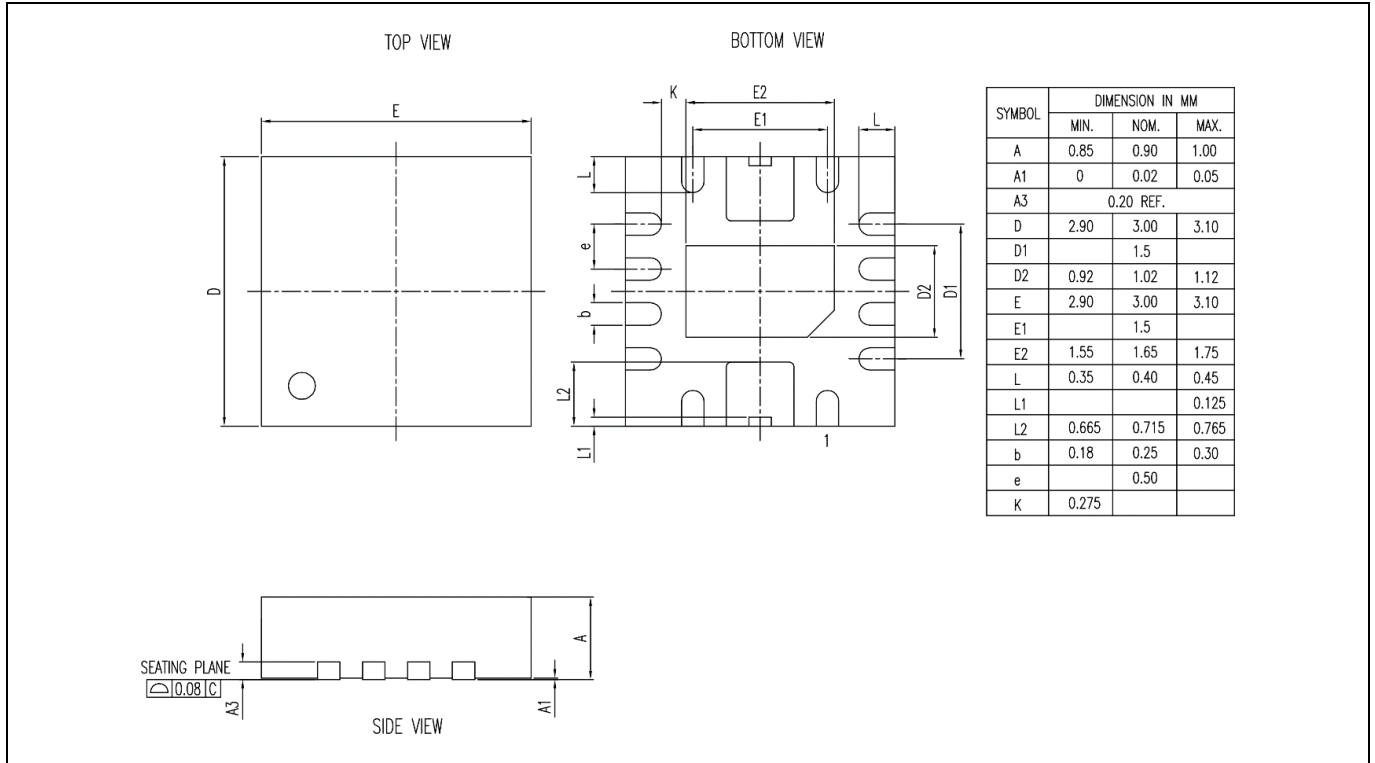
Outline Dimensions of QFN16, 3 mm x 3 mm, Pitch 0.5 mm
